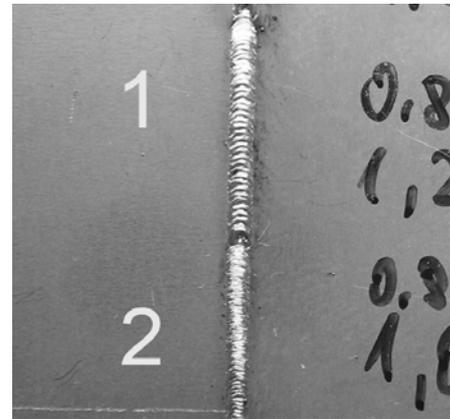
Edge-to-edge welding with pulse power:
